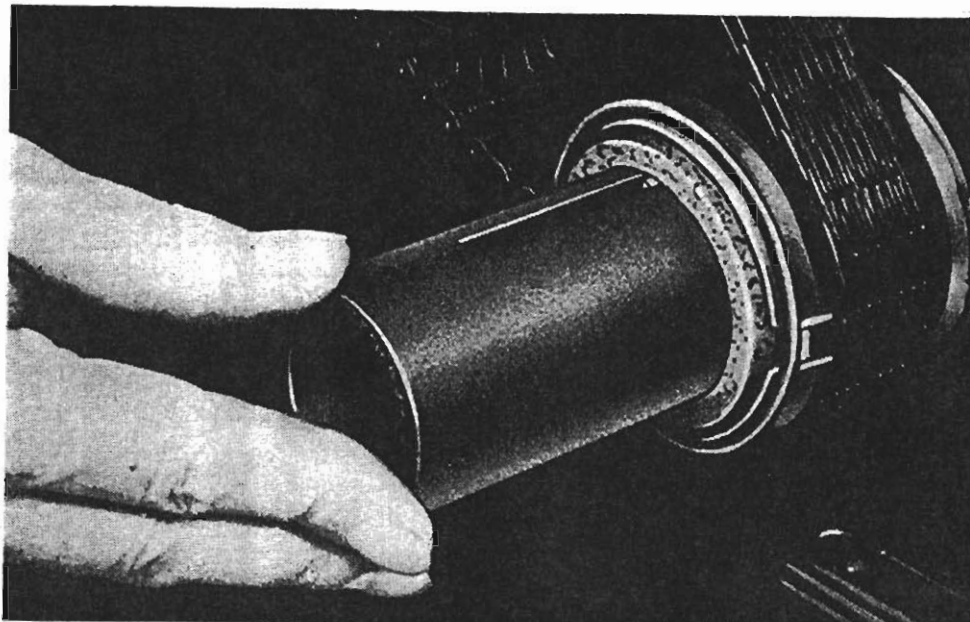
Gear Cover Aligning Arbor J-2572 Should Be Used When Replacing a Crankshaft Front Oil Seal.
